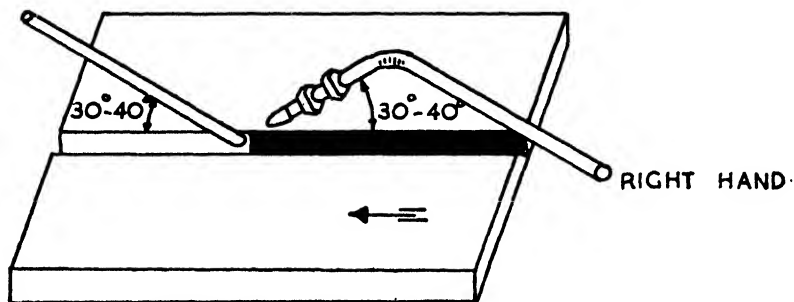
Recommended position of blow-pipe and welding rod.
